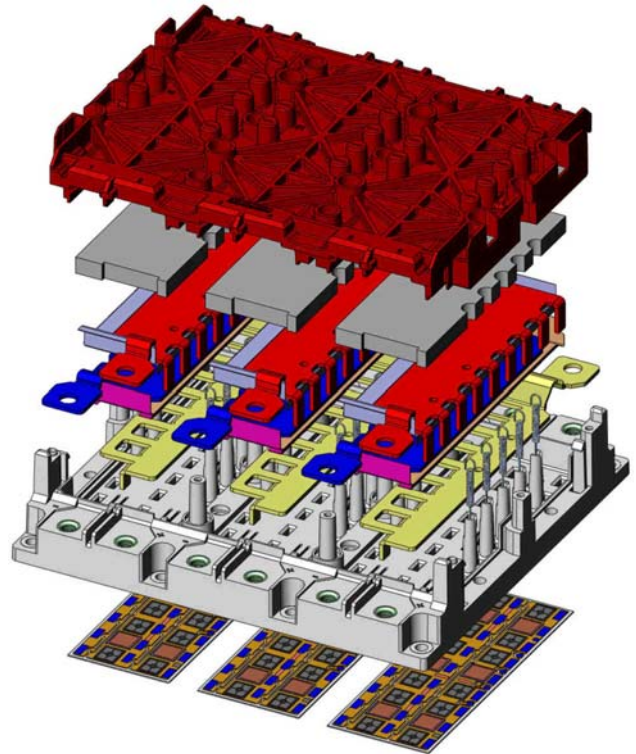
Explosion view of the first 100% solder-free module, showing the sintered substrates, the multi-contact internal bus bar, the springs for the control and sensor contacts and the pressure system.
